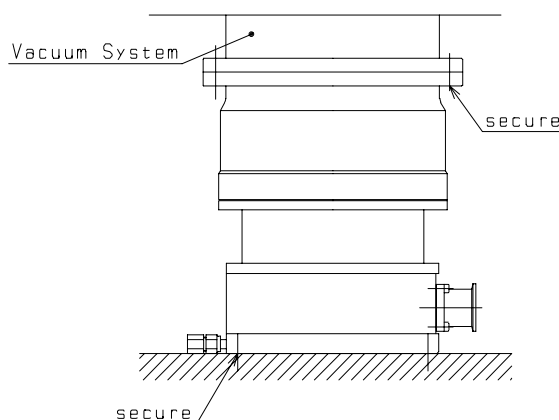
Example of Pump Mounting (Ex. TG1300M/VWB)
